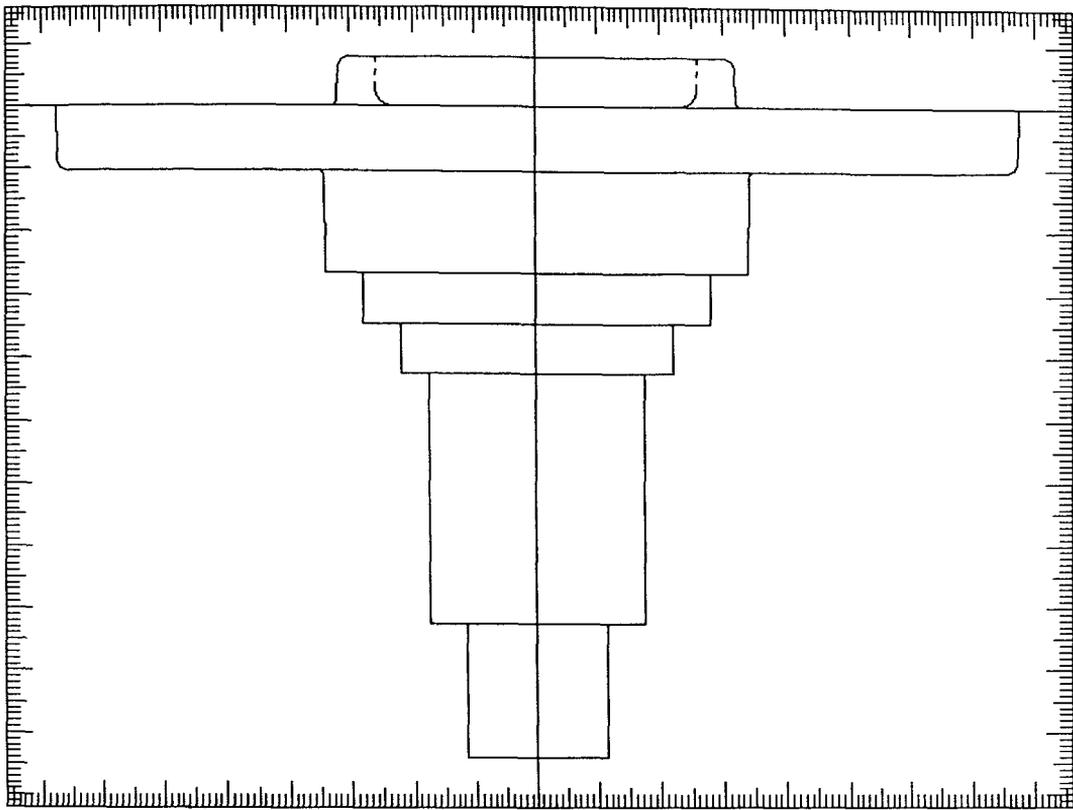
Stub Axle, WFM 3001 (machined part)
